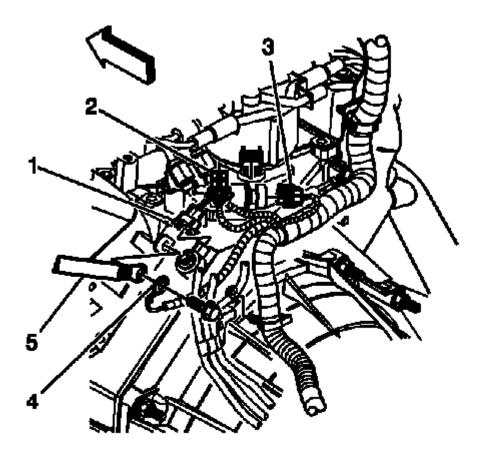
View Of Power Steering Pump Bracket Stud Courtesy of GENERAL MOTORS CORP.
